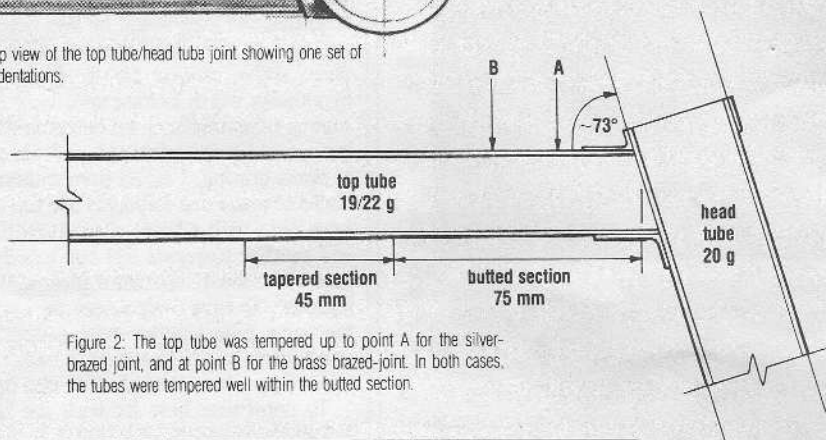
The top tube was tempered up to point A for the silver-brazed joint, and at point B for the brass brazed-joint. In both cases, the tubes were tempered well within the butted section.
